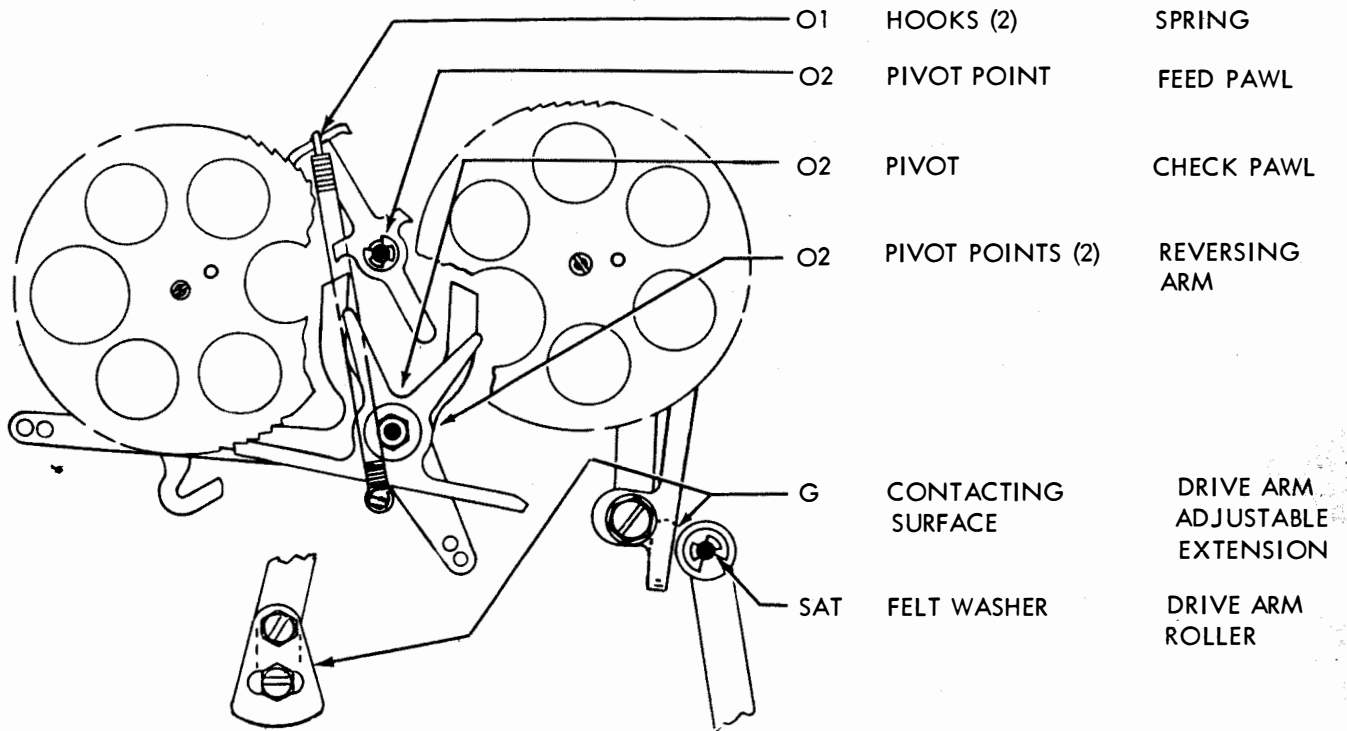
Ribbon-Feed Mechanism (Late Design), Front View
